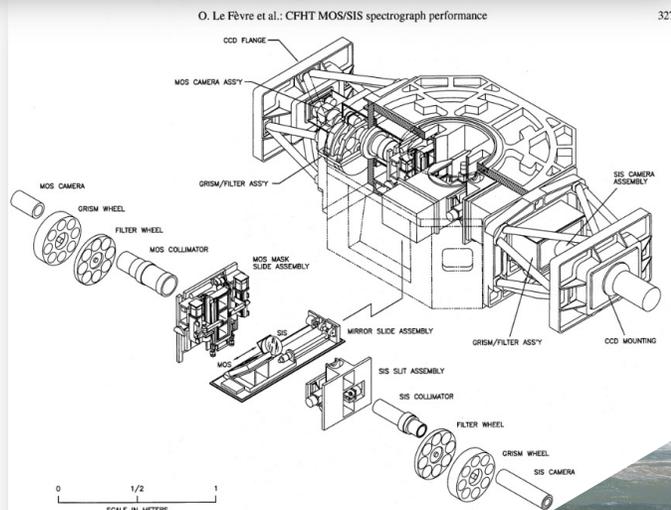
A more detailed 3-D assembly drawing of the MOS/SIS instrument
